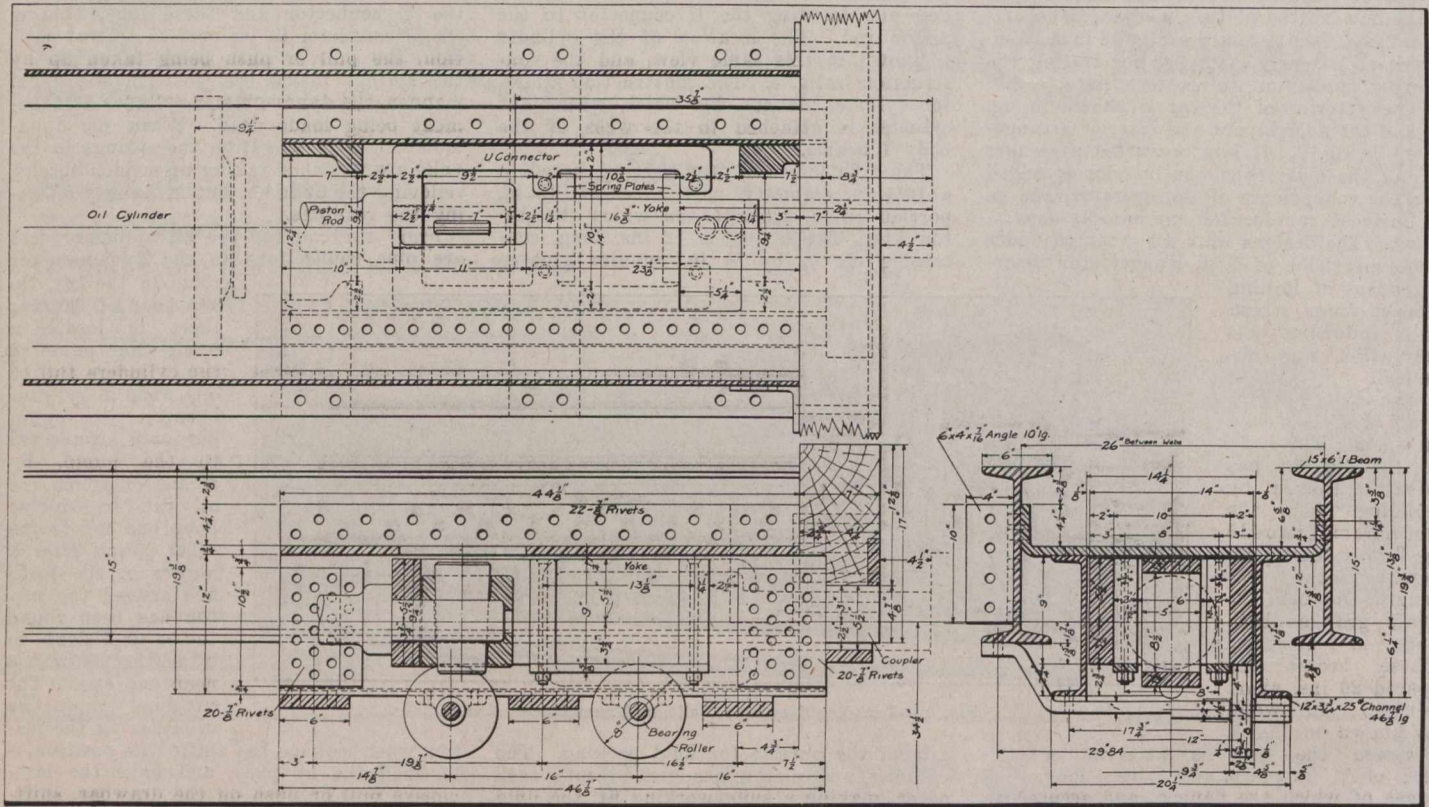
End Construction and Draft Rigging of Dynamometer Car.
